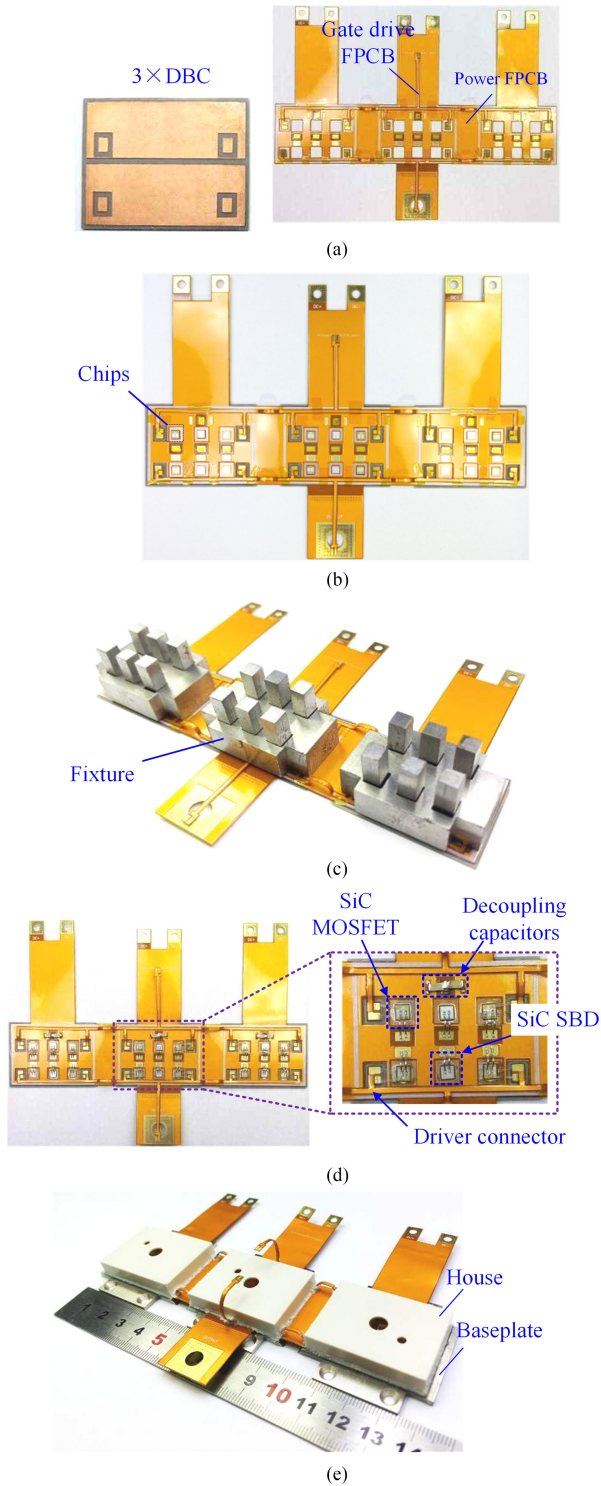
Module fabrication processes. (a) Etched DBC and fabricated FPC board. (b) Placed chips and FPCB. (c) FPC boards and chips soldering. (d) Wire-bonding. (e) Baseplate soldering, housing, and encapsulation.
